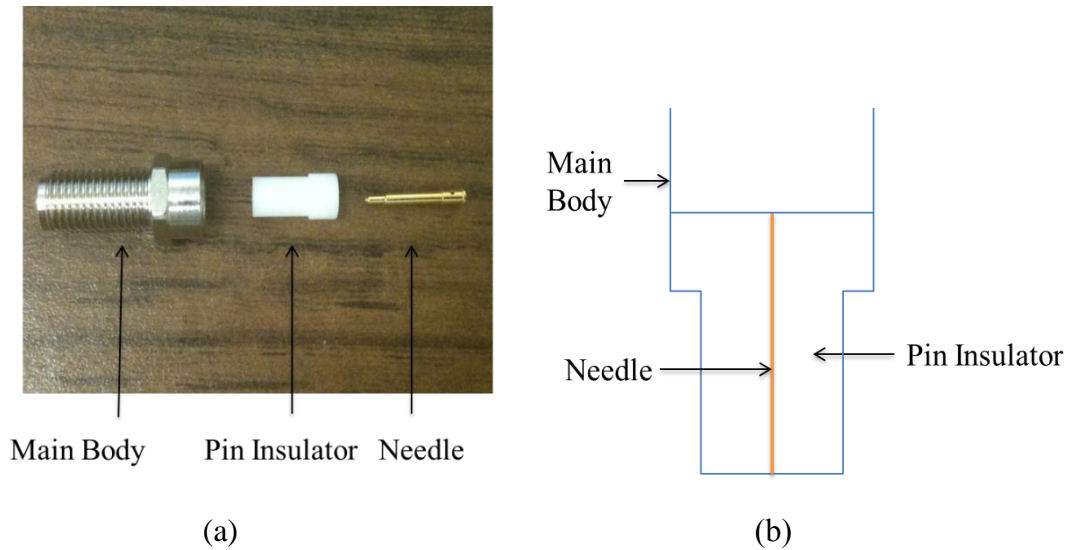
(a) The disassembled SMA connector, including main body, the pin insulator and the needle. (b) The side view sketch of SMA after it is assembled.
